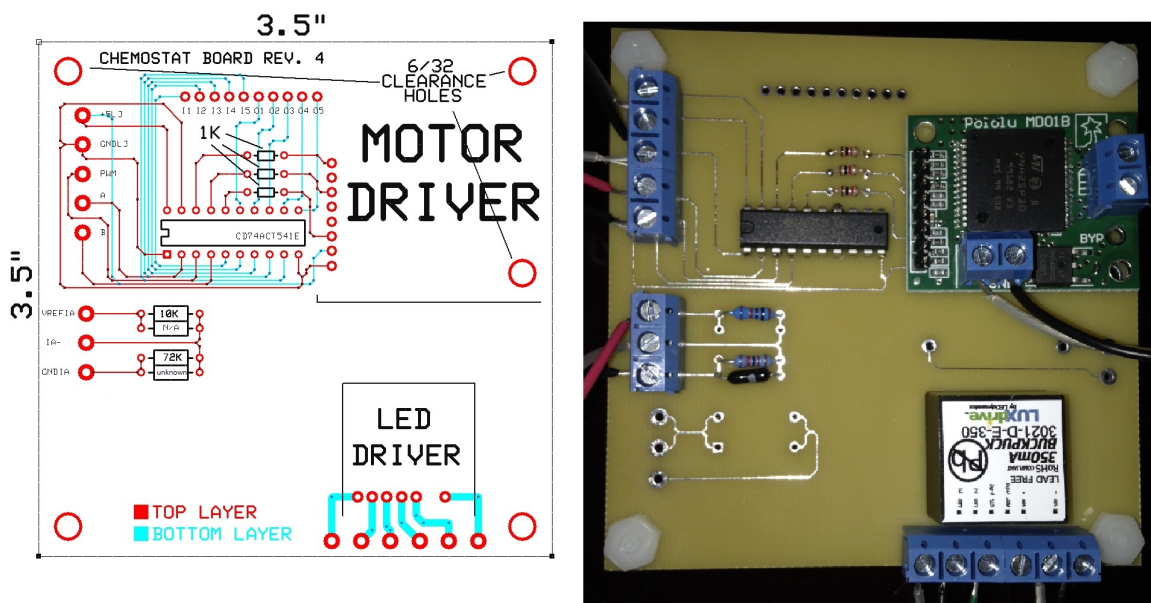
Custom-culture device custom circuit board. Left: final revision of circuit board schematic, with minor changes including improved hole arrangement and added holes for mounting voltage divider resistors in parallel. Right: actual circuit board appearance as used in experiments.
